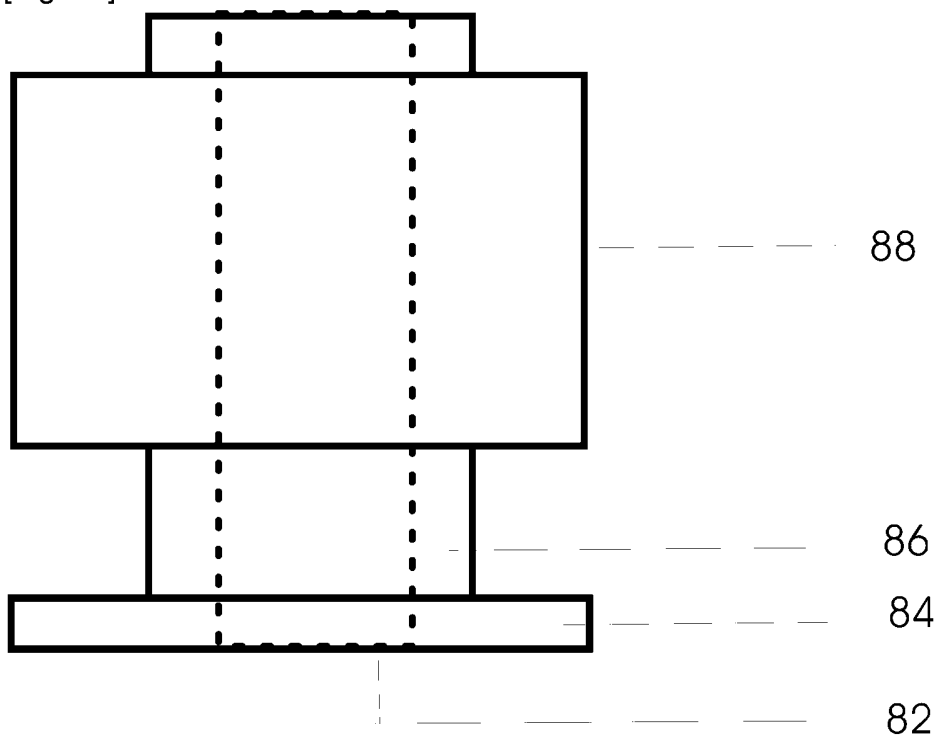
THE CLUTCH YOKE FOR THE MACHINE
